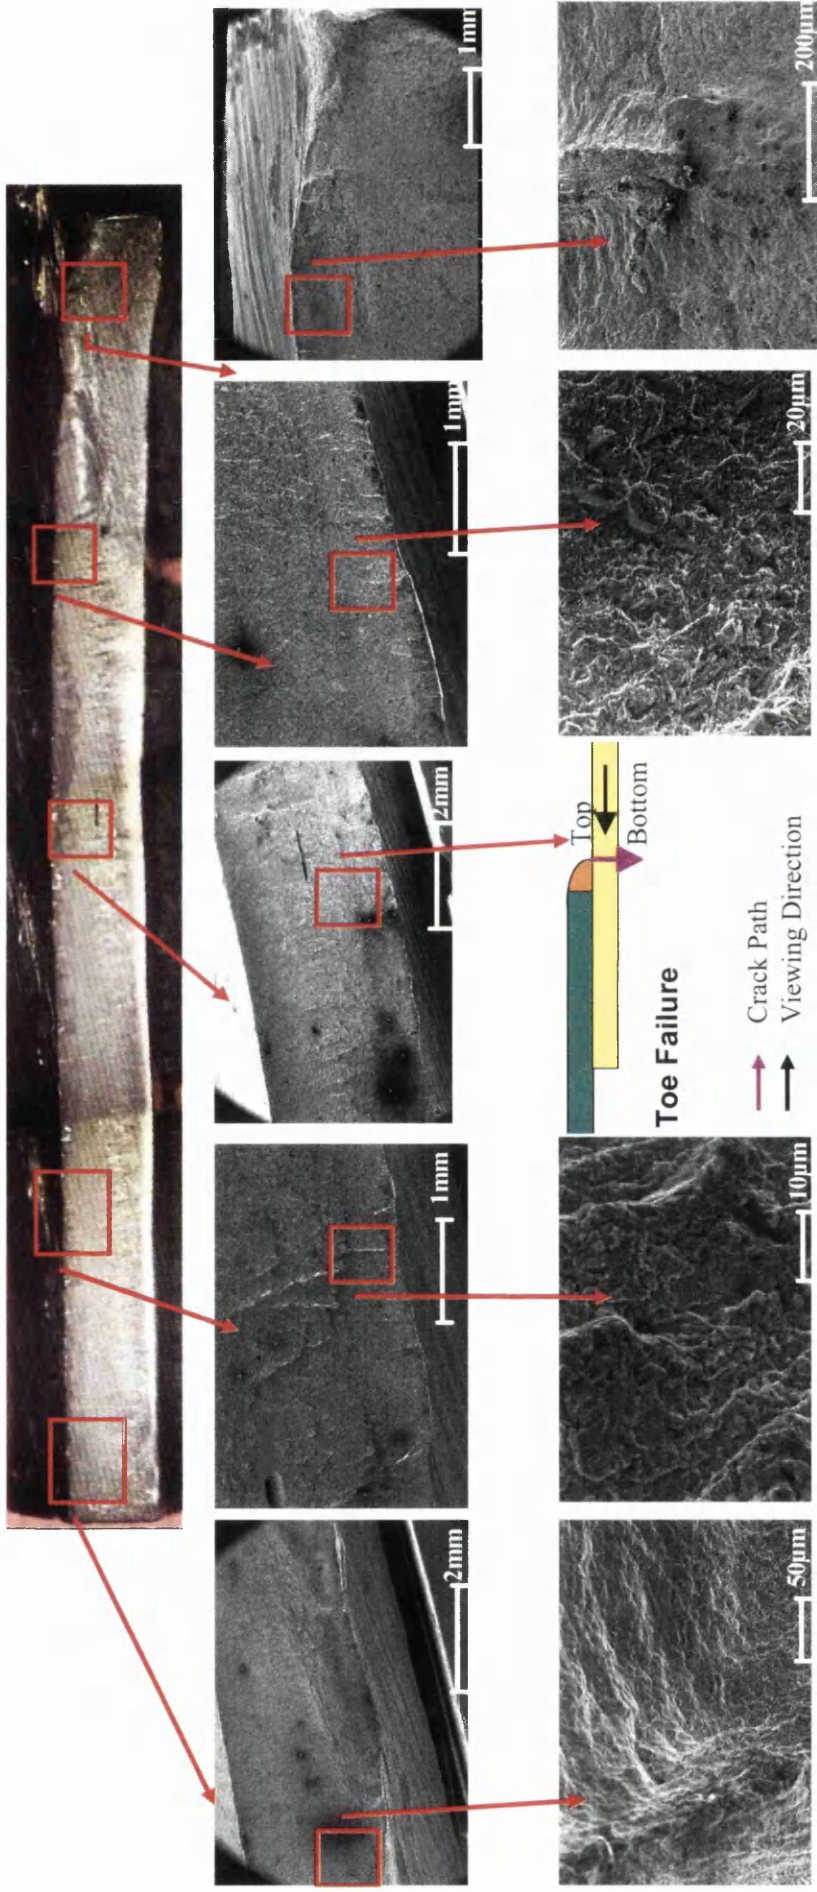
Typical Fracture Surface for GM2 Weld Toe Failure – Weld View
